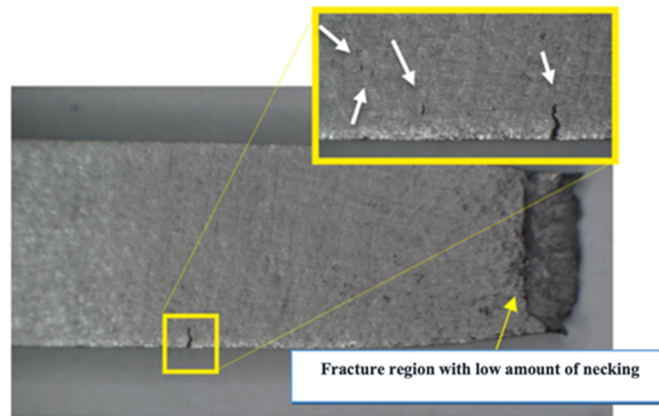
Typical gauge length of the samples subjected to tensile test, after fracture.
